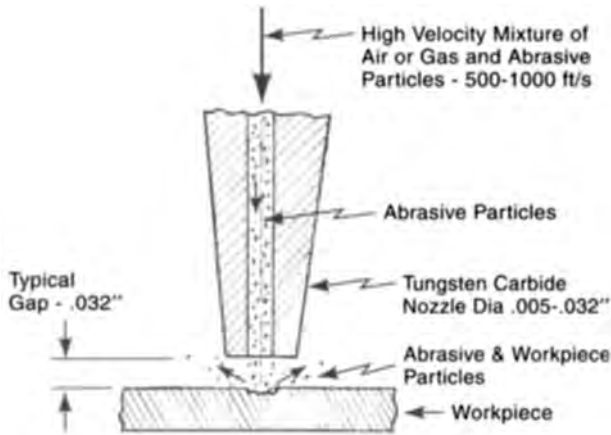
C9 Abrasive jet machining - A high velocity stream of air or gas and abrasive particles impinge on the workpiece and remove workpiece material. The process is particularly useful in drilling, cutting, or engraving hard, brittle materials including non-metallic materials. (Courtesy Omax Corporation.)
